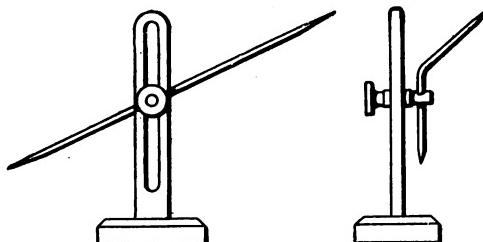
Drawing of the simple surface gauge shown in Fig. 118
